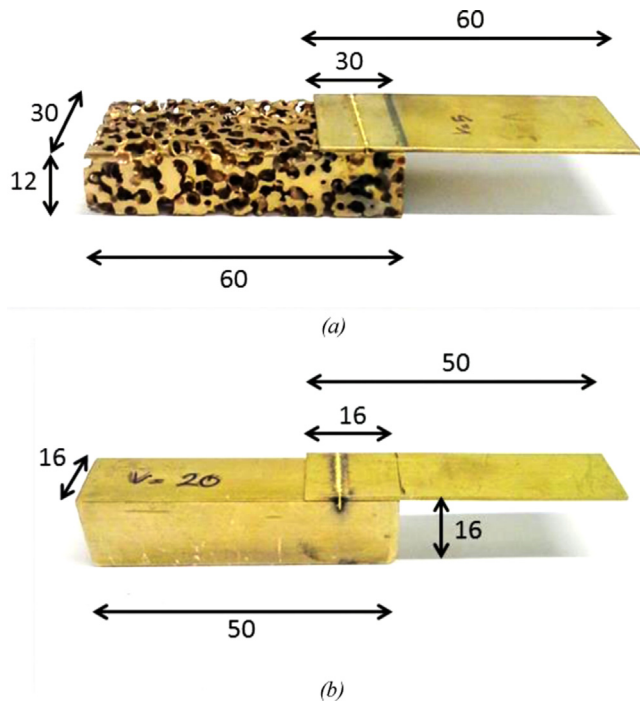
Samples welded for the mechanical testing in (a) plate/foam and (b) plate/bulk lap joint.
